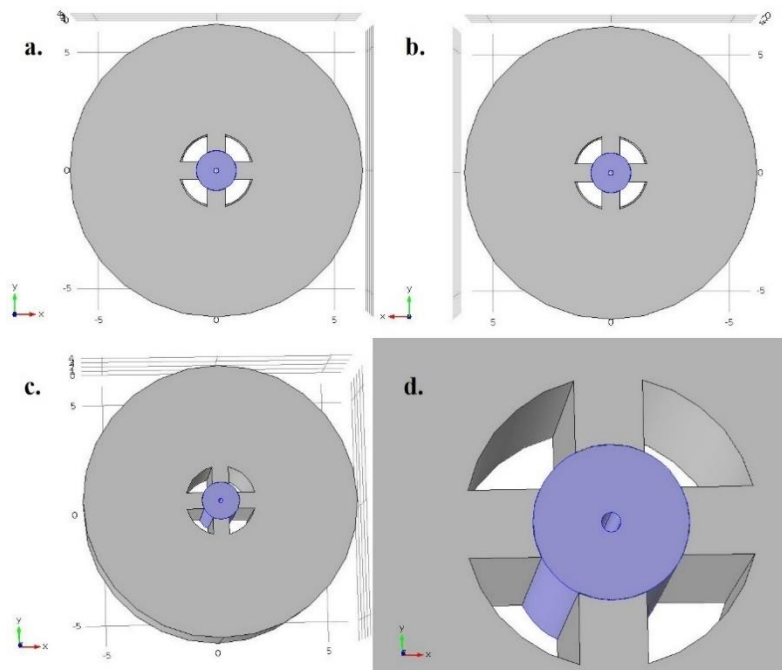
Schematic illustrations of solid view of upper part prototype 5, (a. top view, b. bottom view, c. inclined top view, d. magnified top view)
